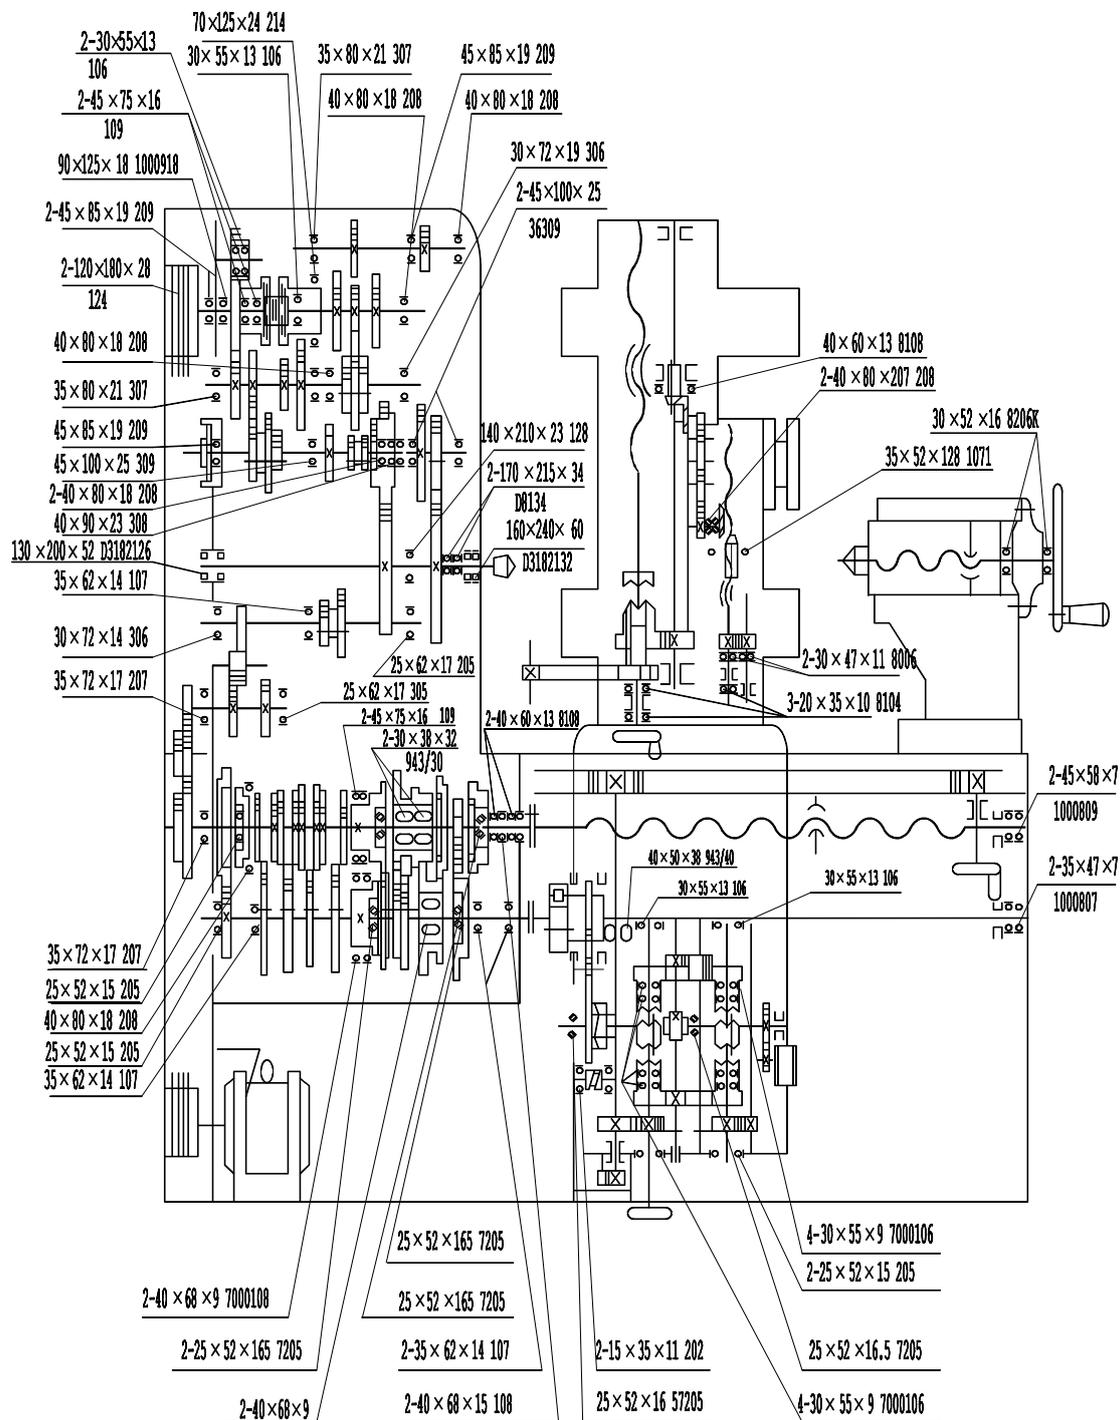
Arrangement of rolling bearings for CW63B and CW93B
